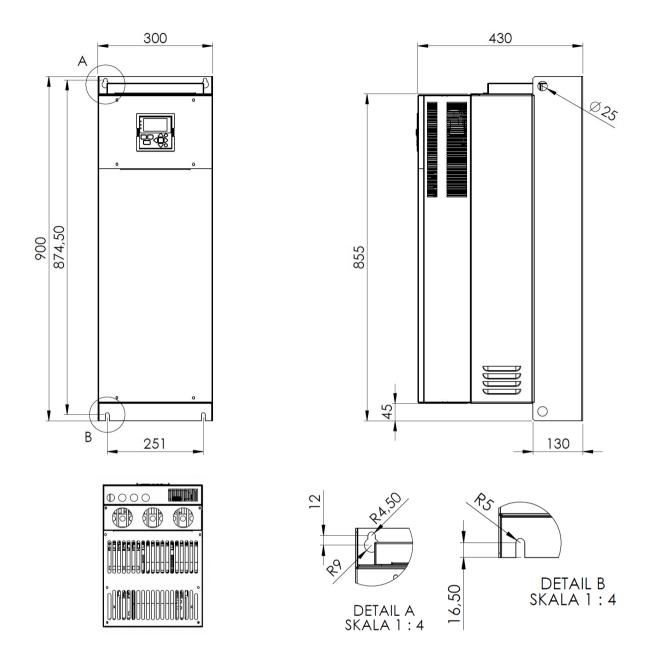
Mechanical dimensions MFC1000AcR converters
